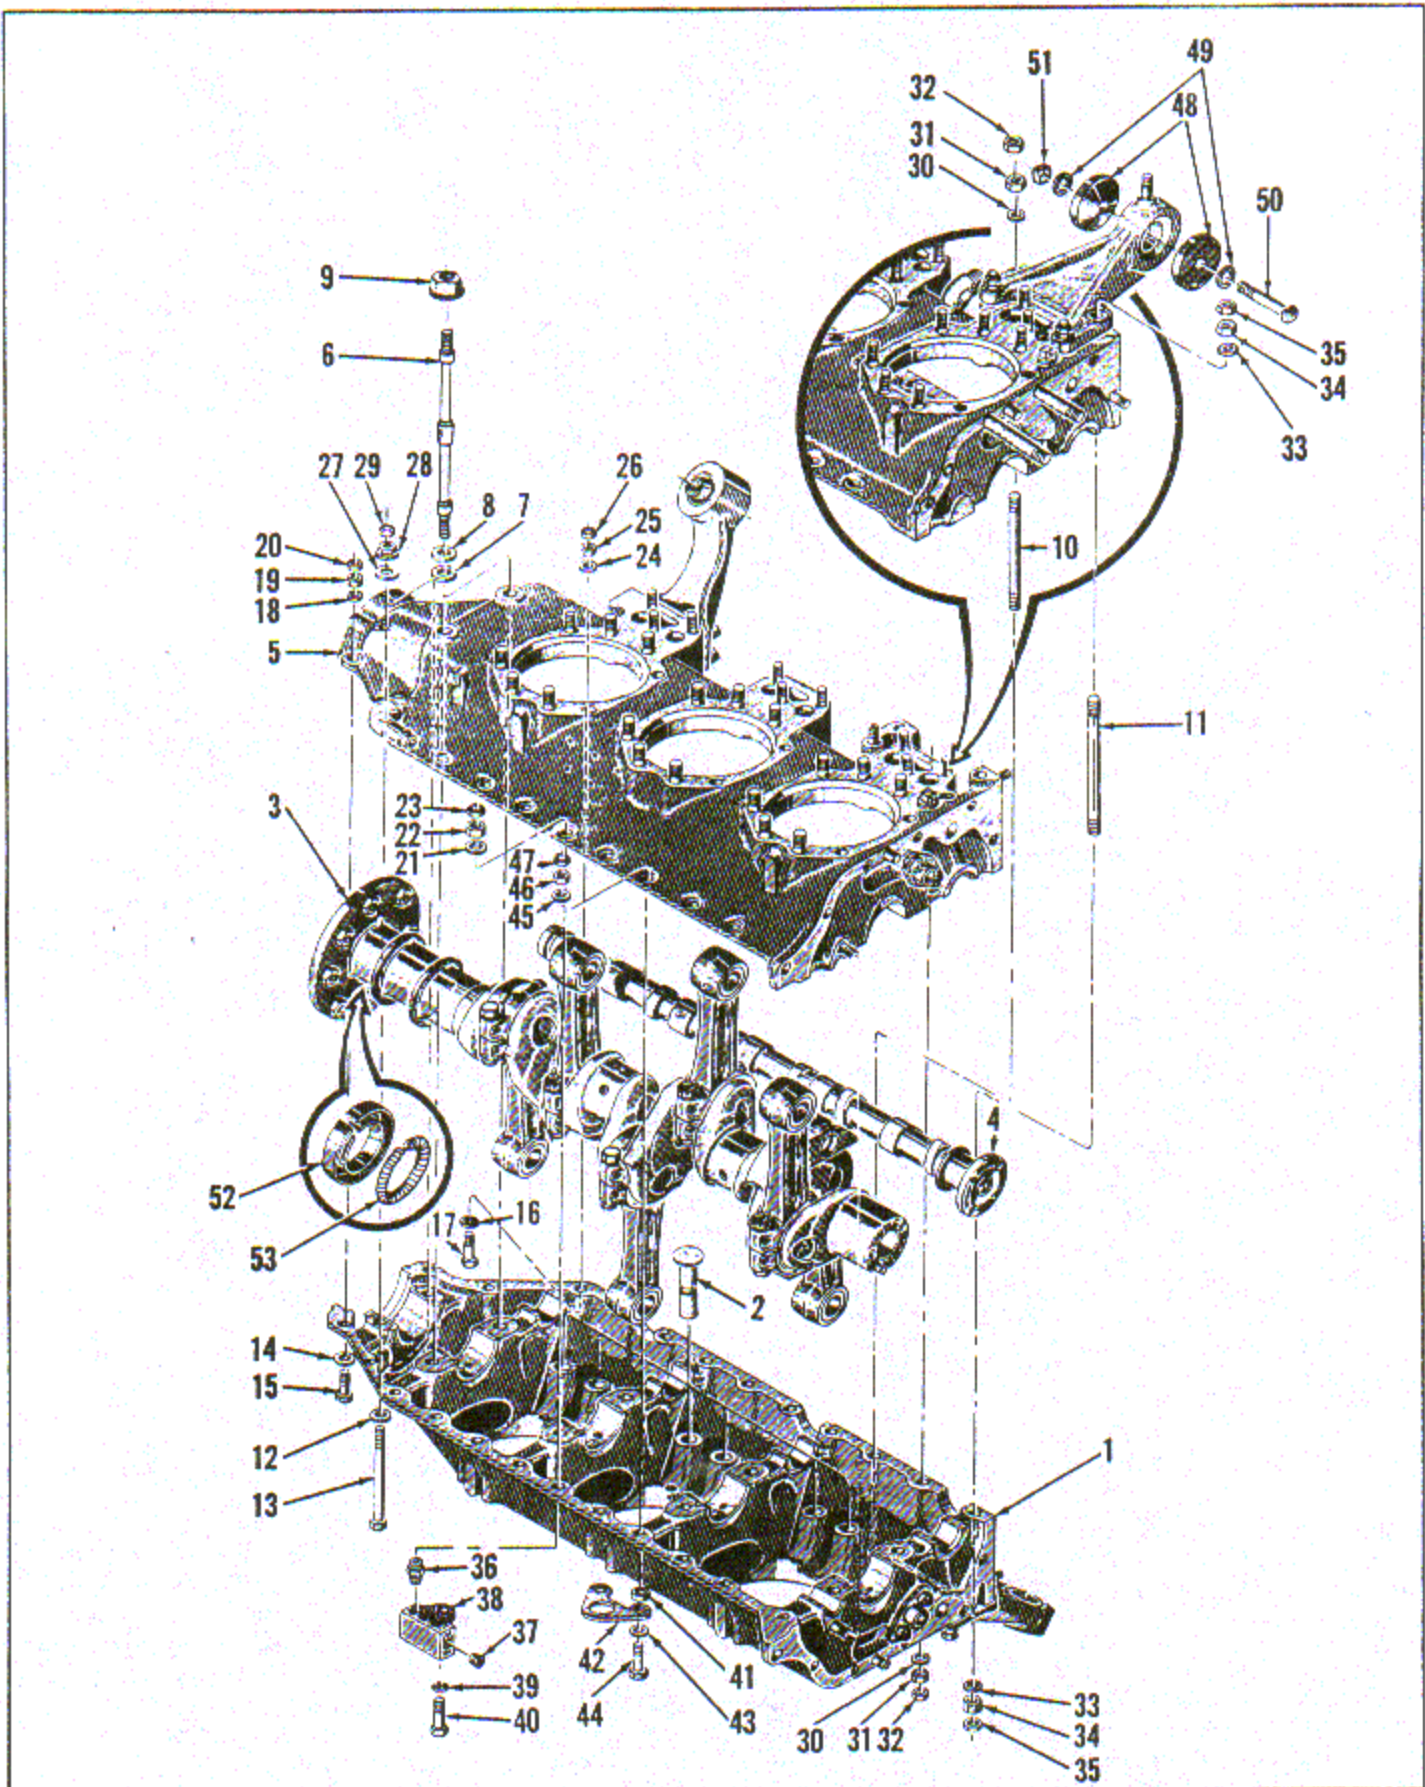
Crankcase Assembly Procedure (Sheet 1 of 3)
